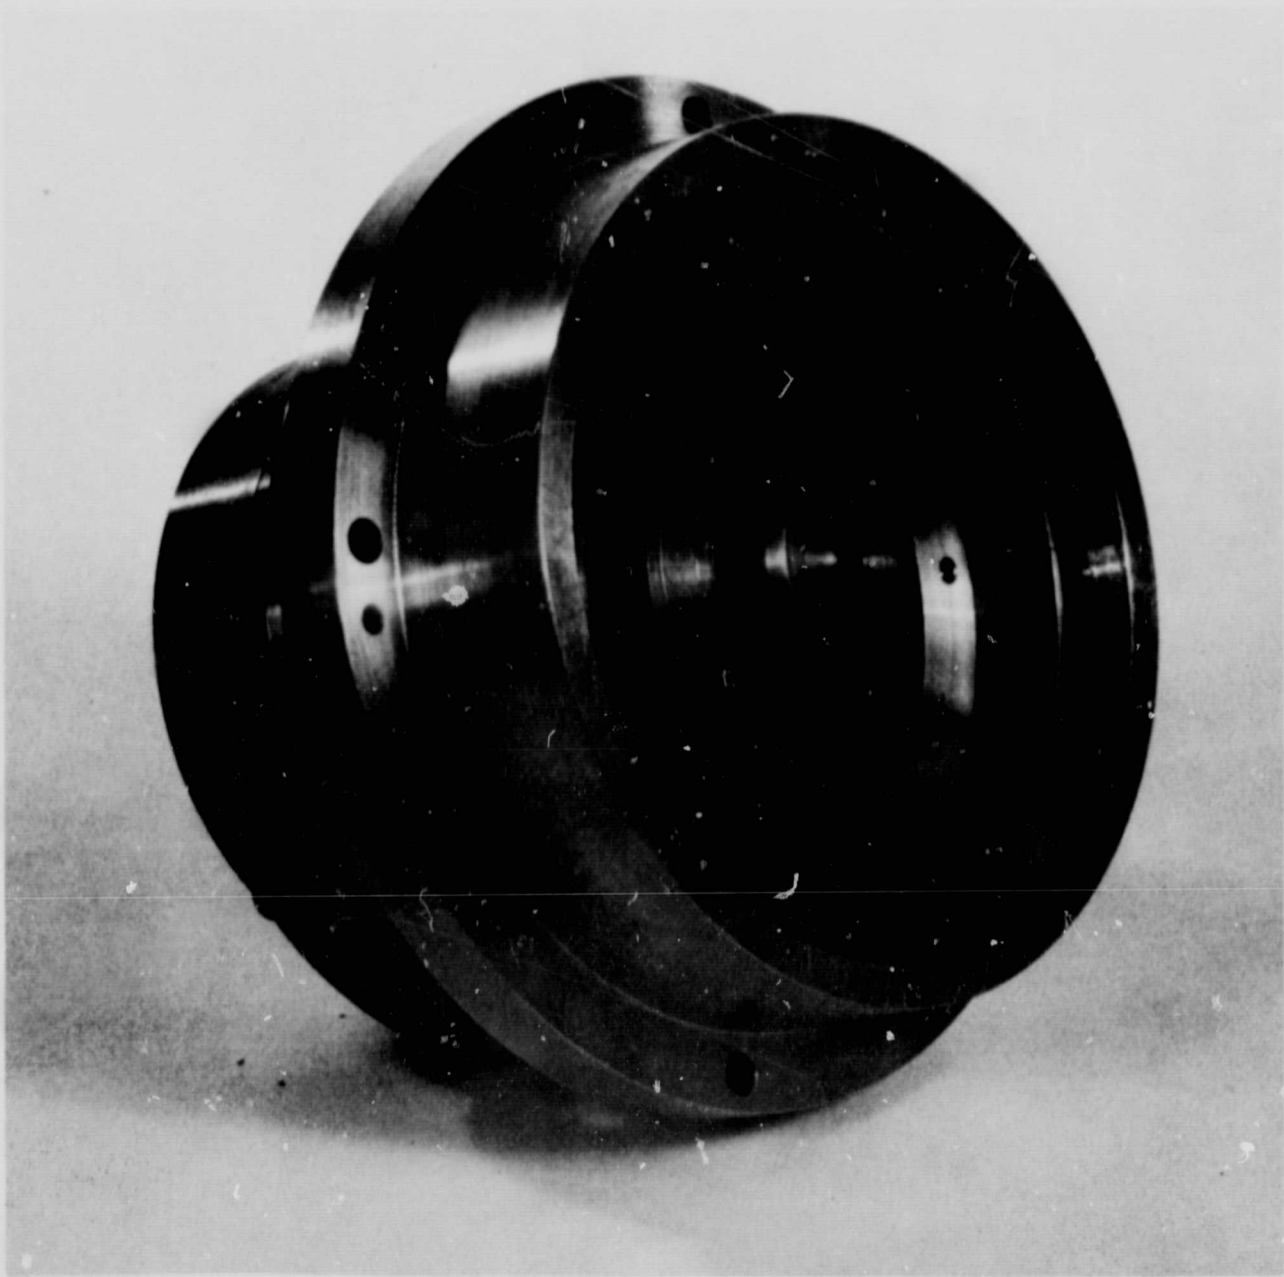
Rear View of Yaw Axis Pivot Assembly.
